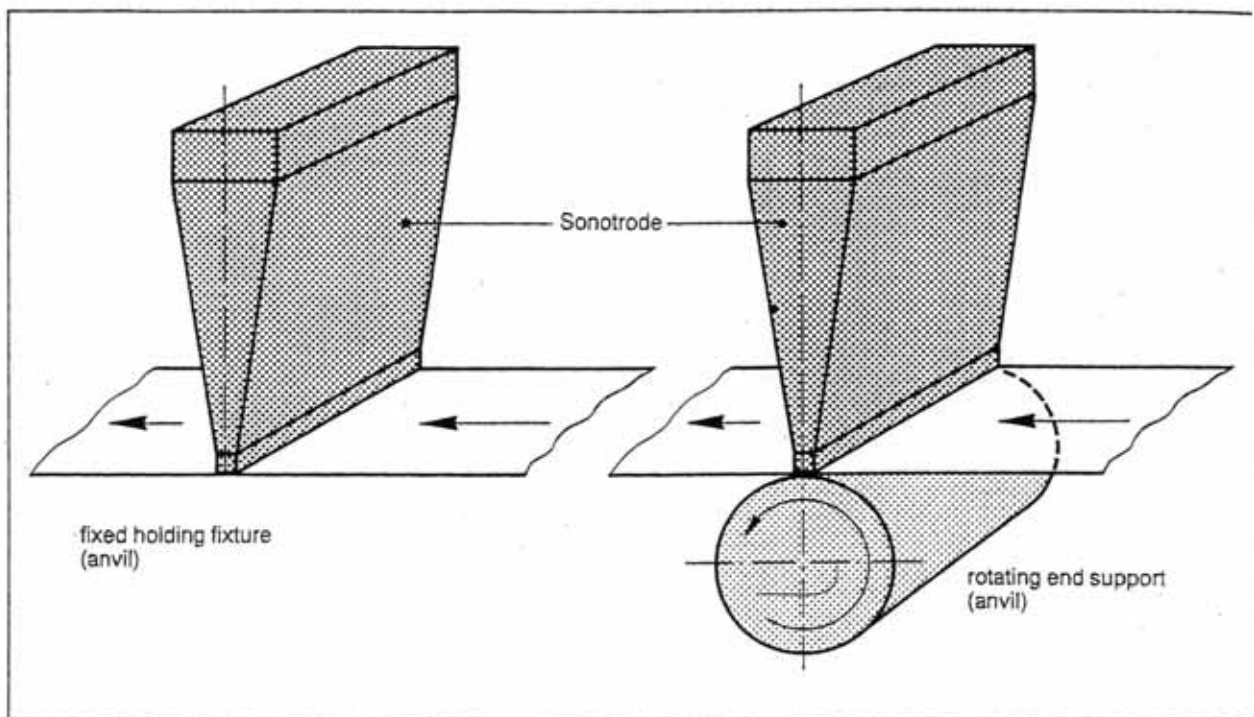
Ultrasonic seam welding non-continuously by line seam sonotrode.
